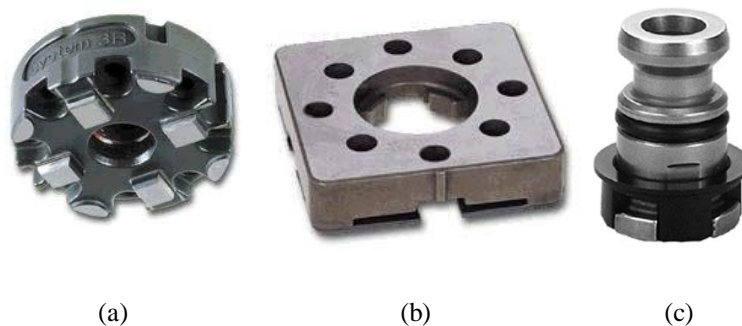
Tool changer 3R-600.24-S. (a) and the macro pallet 3R-651.7E-S (b) and 3R-605.2 drawbar (c) from System 3R company.
